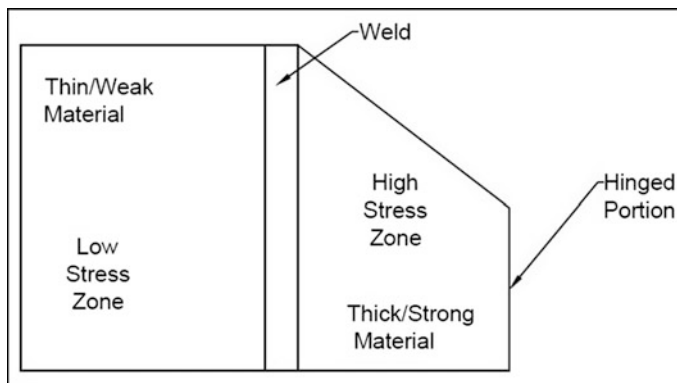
Schematic representation of TWB used in inner door panel of a car body
